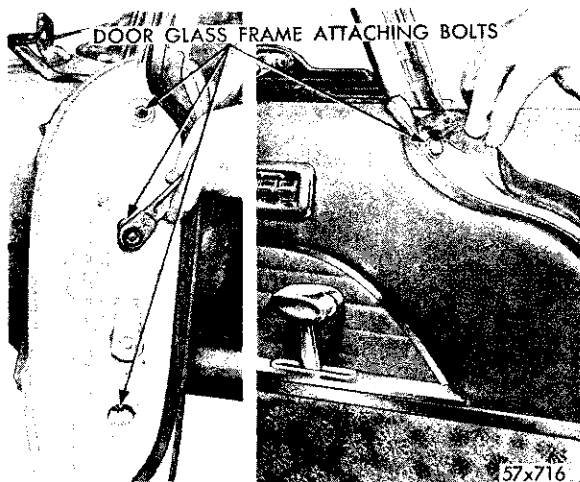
Removing and Installing Adjusting Frame and Glass Assembly
